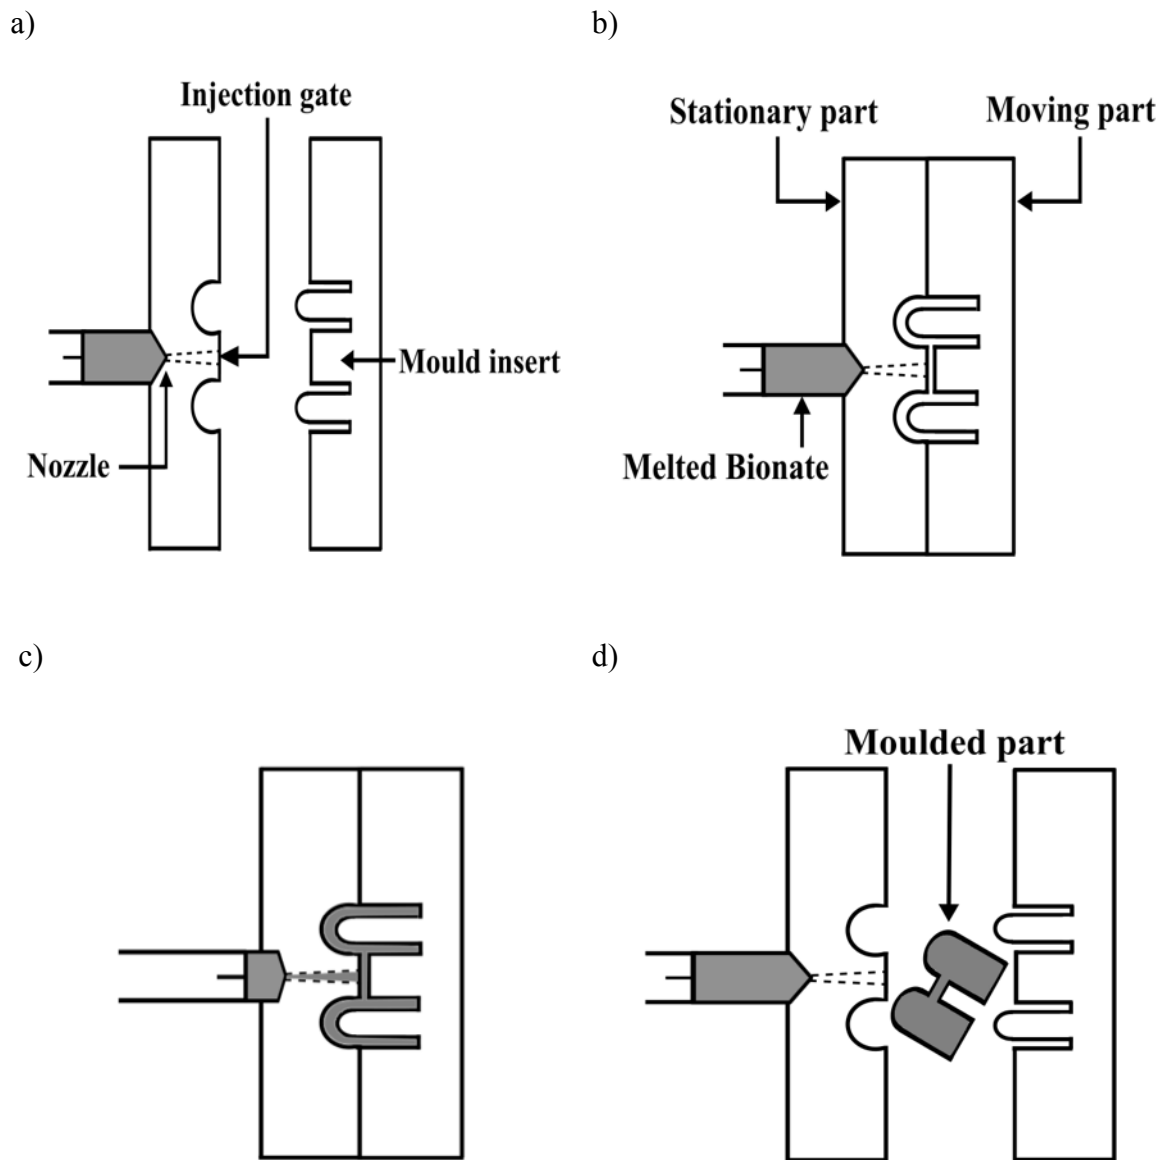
Schematic drawing of the microinjection moulding process: a) plasticization b) clamping c) moulding-holding and d) demoulding
